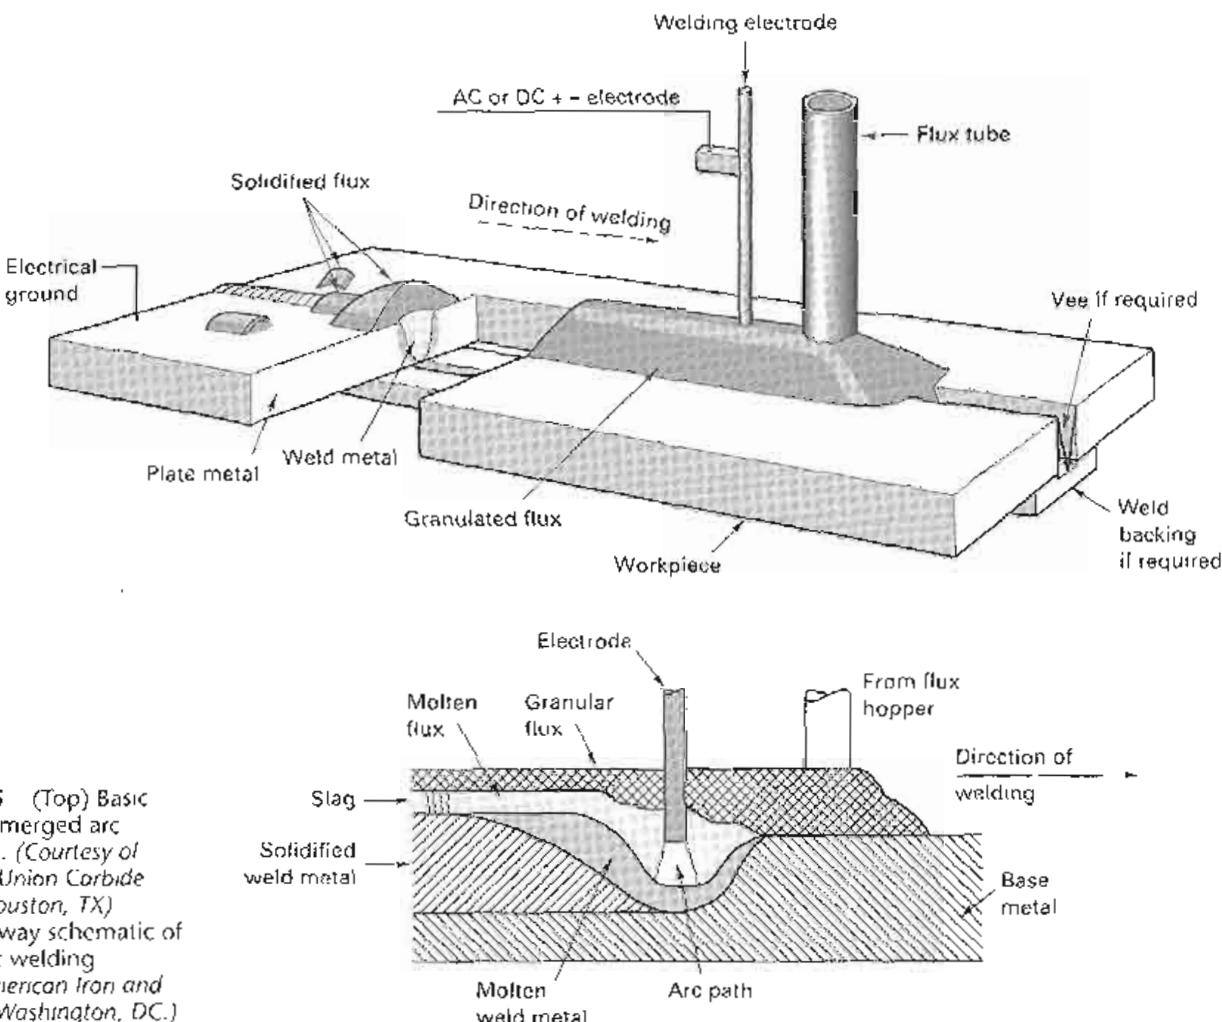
(Top) Basic features of submerged arc welding (SAW). (Courtesy of Linde Division, Union Carbide Corporation, Houston, TX) (Bottom) Cutaway schematic of submerged arc welding (Courtesy of American Iron and Steel Institute, Washington, DC.)
